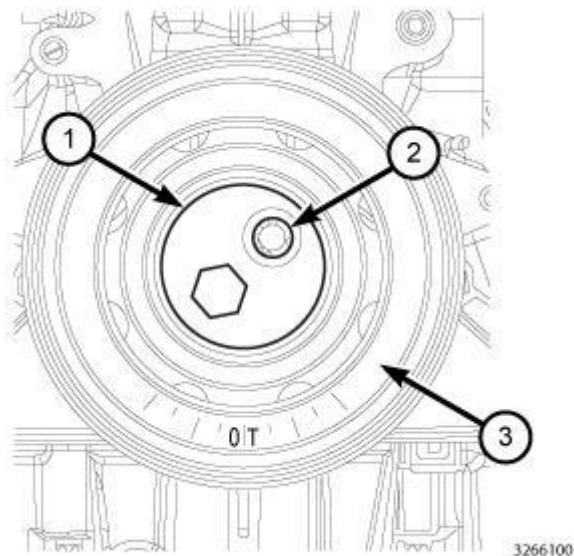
Vibration Damper Holder Tool, Vibration Damper & Bolts
